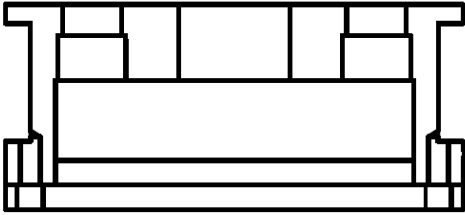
Cross-sectional view of the old sample holder (not to scale)
